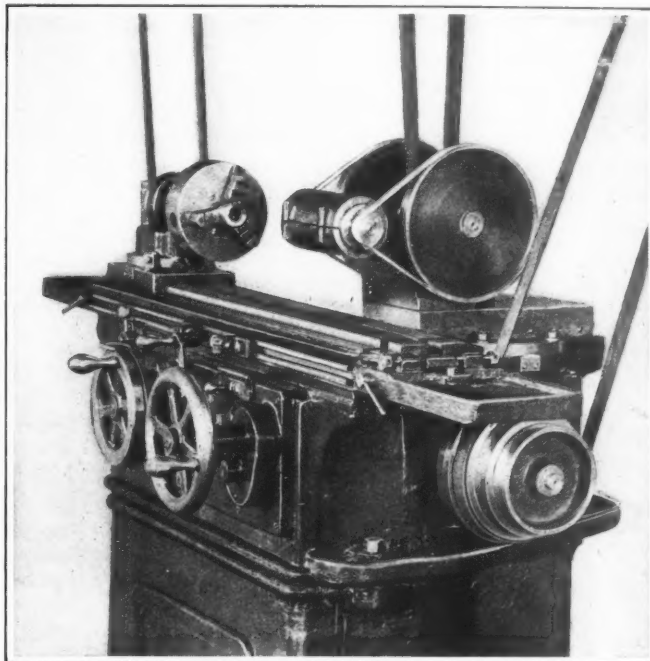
Fraser Universal Grinding Machine set up for Internal Grinding
